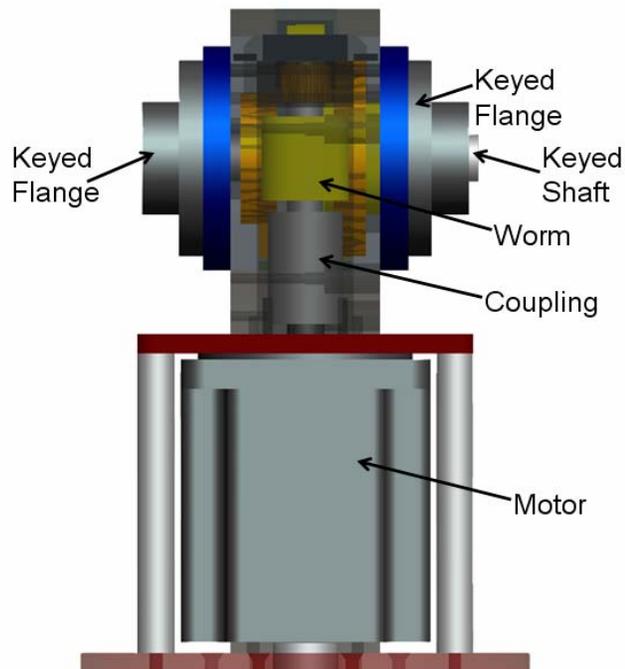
Rotational joint motor connection to sliding link structure and motor mount.
